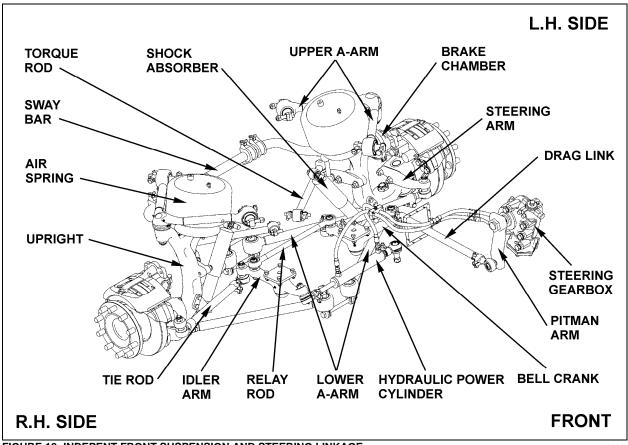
INDEPENT FRONT SUSPENSION AND STEERING LINKAGE
